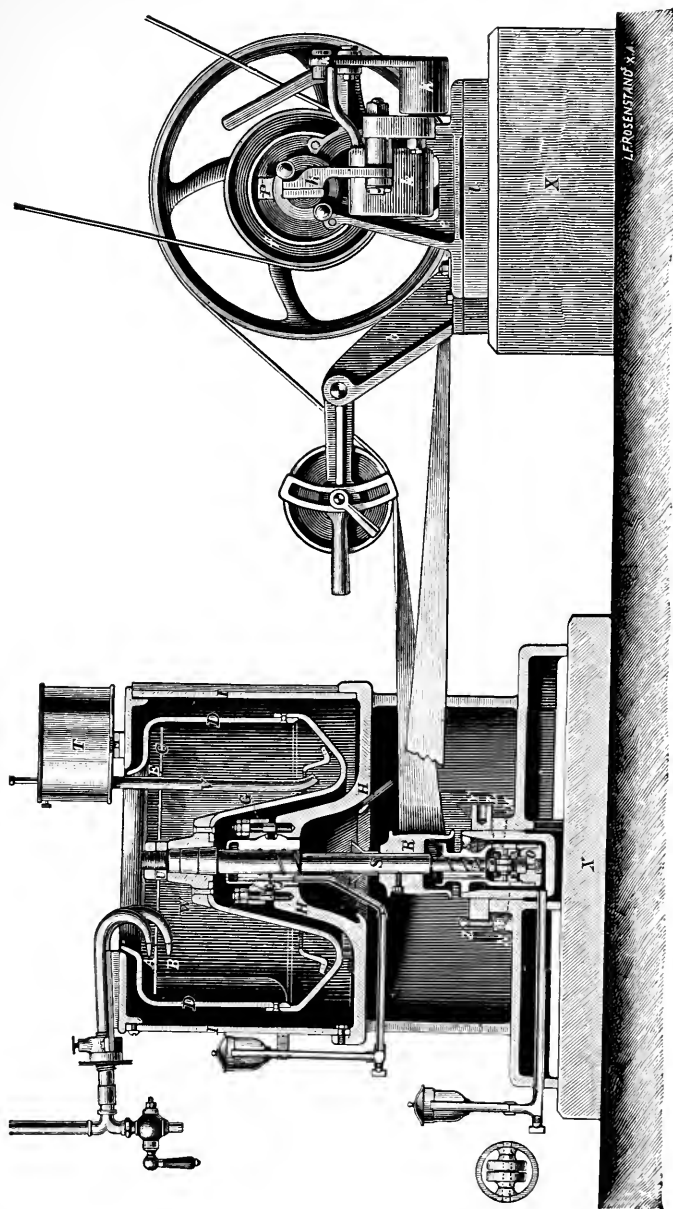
Danish Centrifugal Cream Separator (Burmeister & Wain). (Perpendicular Section.)
